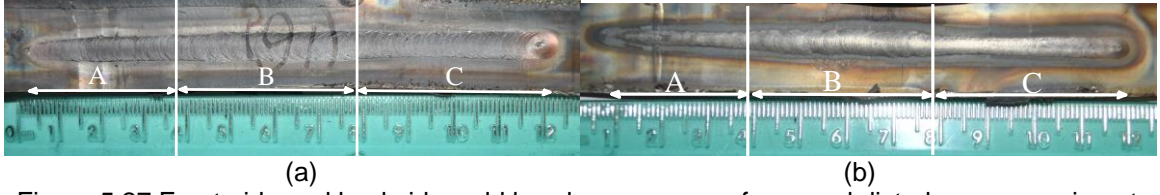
Front-side and backside weld bead appearances for speed disturbance experiment. (a) Front-side weld bead; (b) back-side weld bead.
